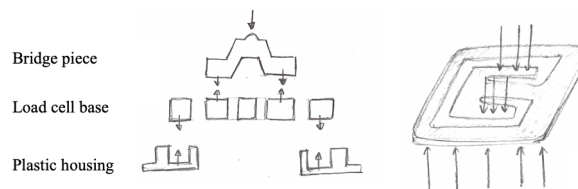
Force diagram of bridge, load cell, and plastic houses at section cut; isometric view of desired force distribution.
